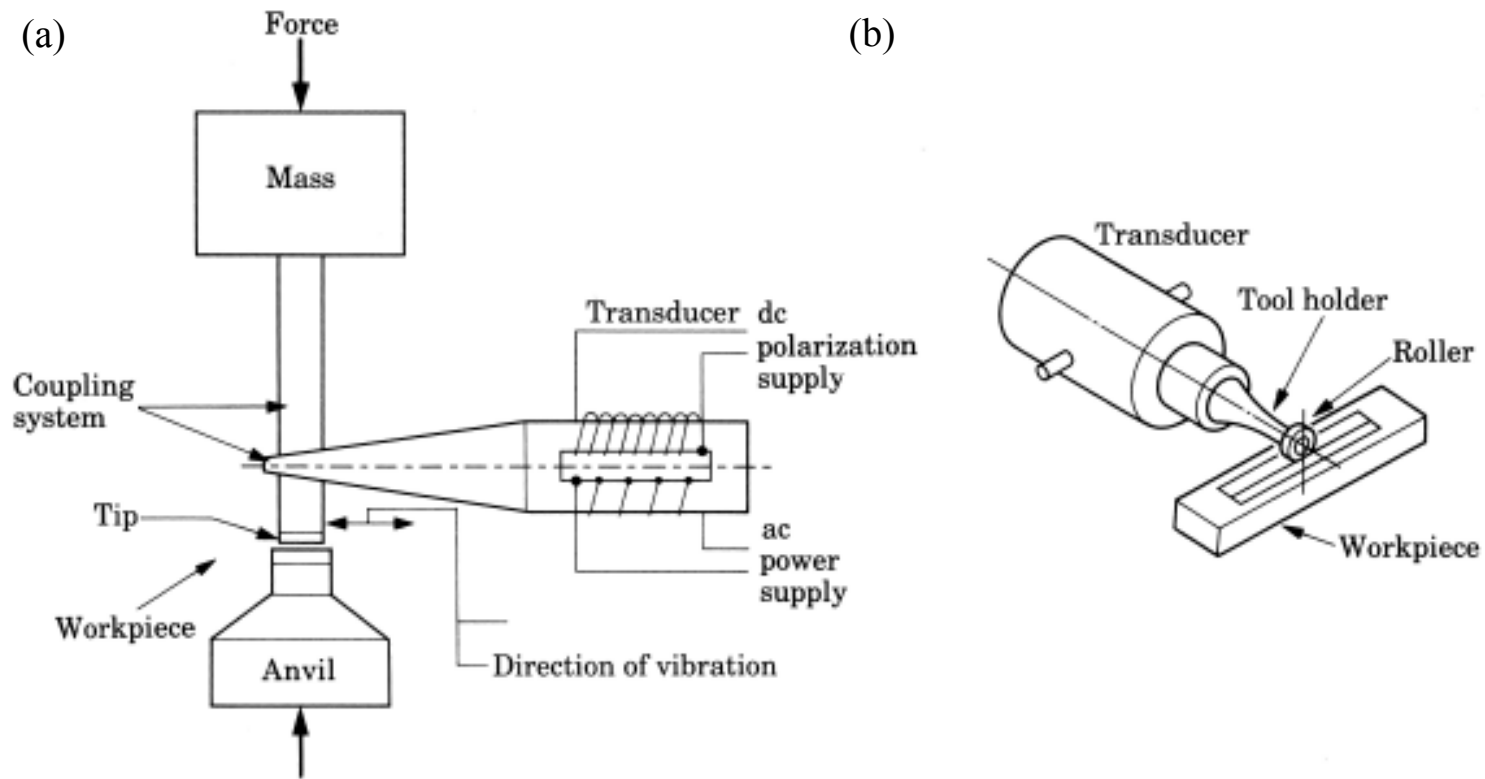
(a) Components of an ultrasonic welding machine for lap welds. The lateral vibrations of the tool tip cause plastic deformation and bonding at the interface of the workpieces. (b) Ultrasonic seam welding using a roller.
